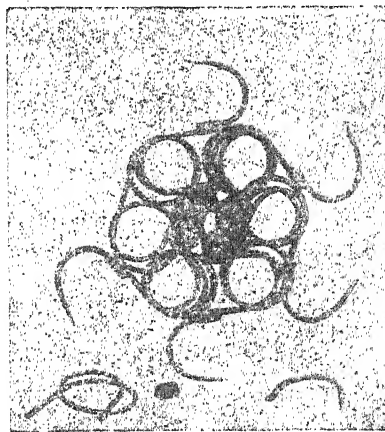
Part of Meyenburgian rotary cutting machine.
